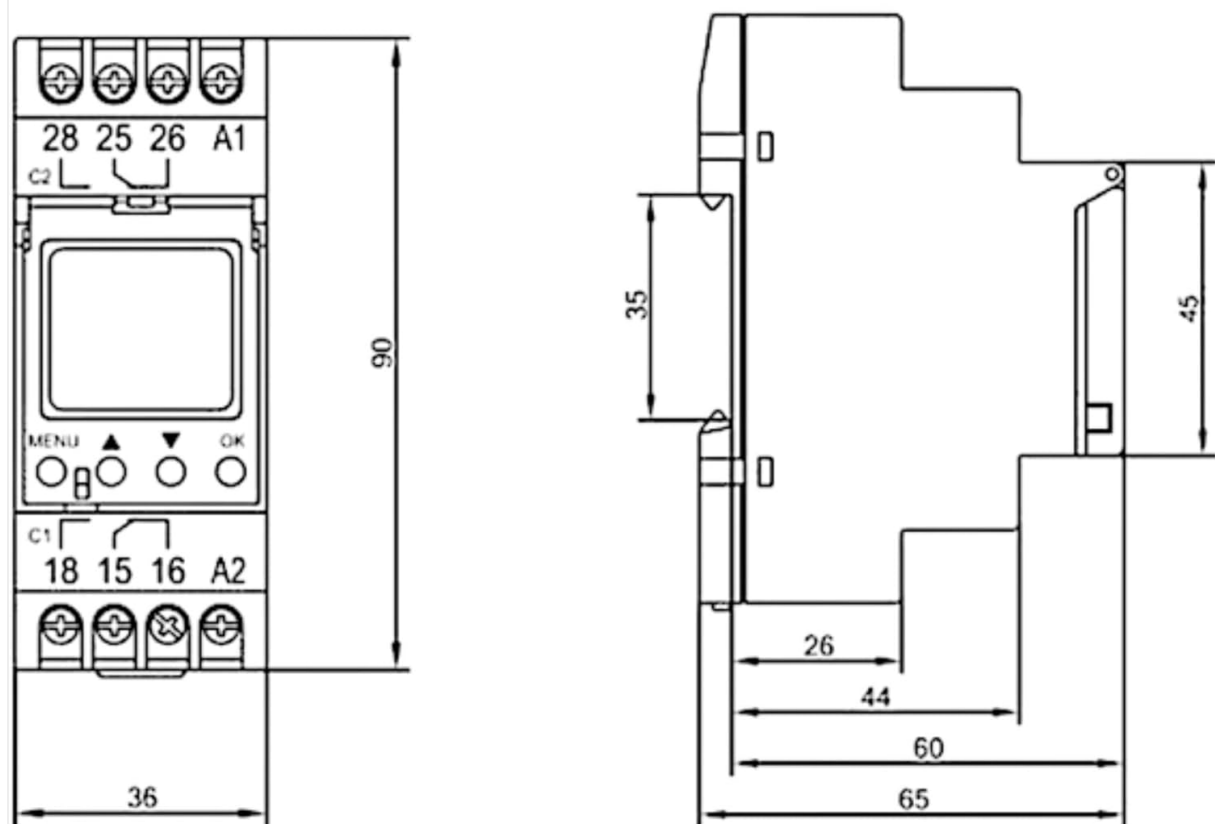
Dimensional drawing of the ORNO PRE-450, indicating key measurements for installation.
